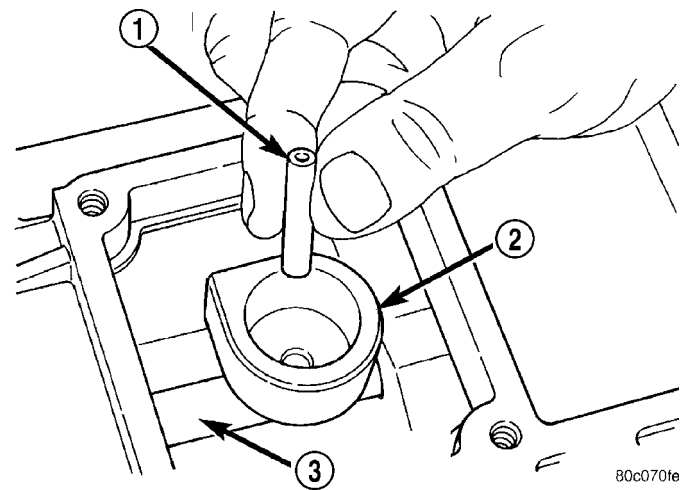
STARTING ROLL PIN IN SHIFT SOCKET
